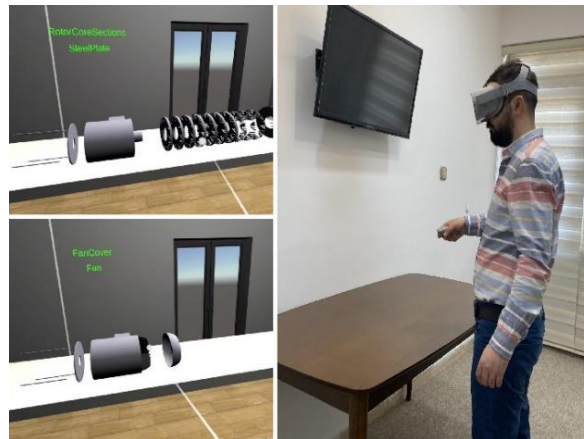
User in the testing process the assembled part (Maintenance Machine).
